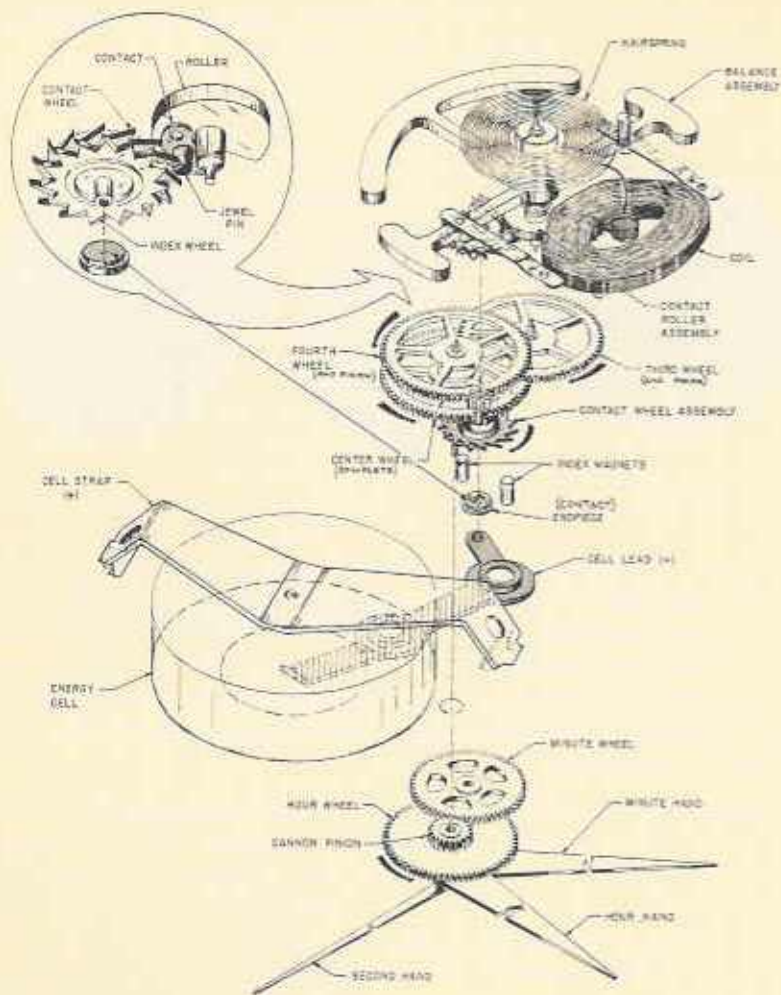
An exploded view of the working principles of the calibre 505. The stamped rim-sector at the top and two kidney-shaped counterweights at the sides make up the balance assembly. Note the enlarged view of the contact arrangement.
